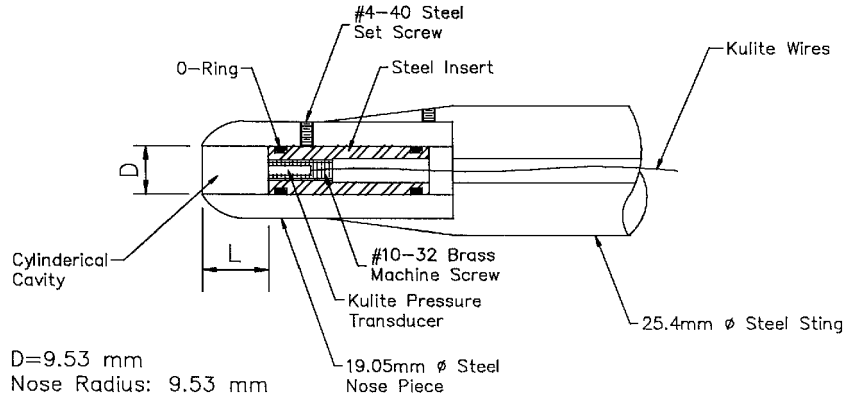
Sectional view of cavity model used in Mach 4 PQFLT runs.
